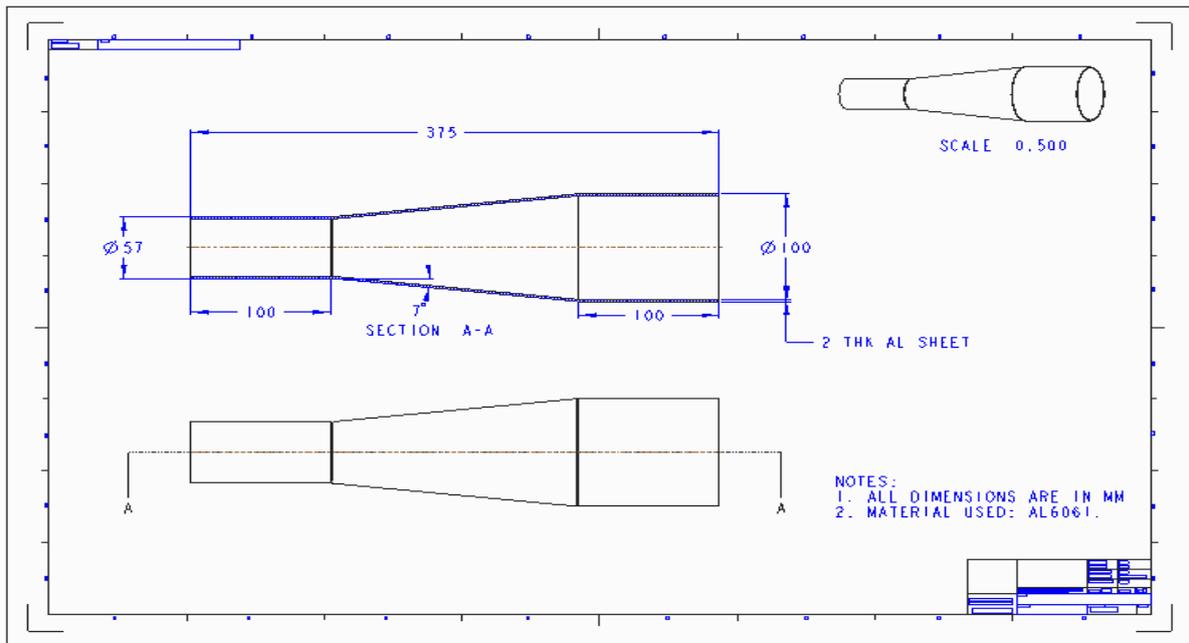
Drawing Specifications of a circular exhaust diffuser
